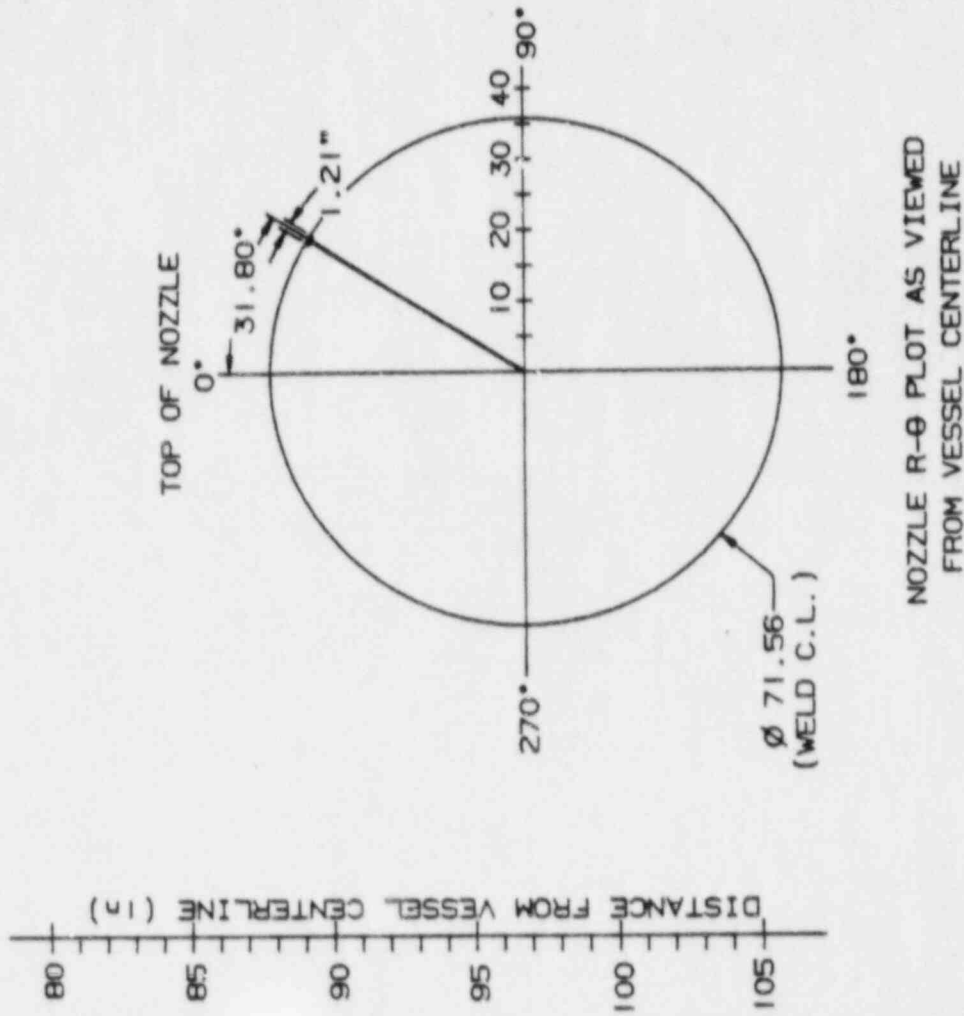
LOCATION OF INDICATION 1A IN OUTLET NOZZLE TO SHELL WELD
